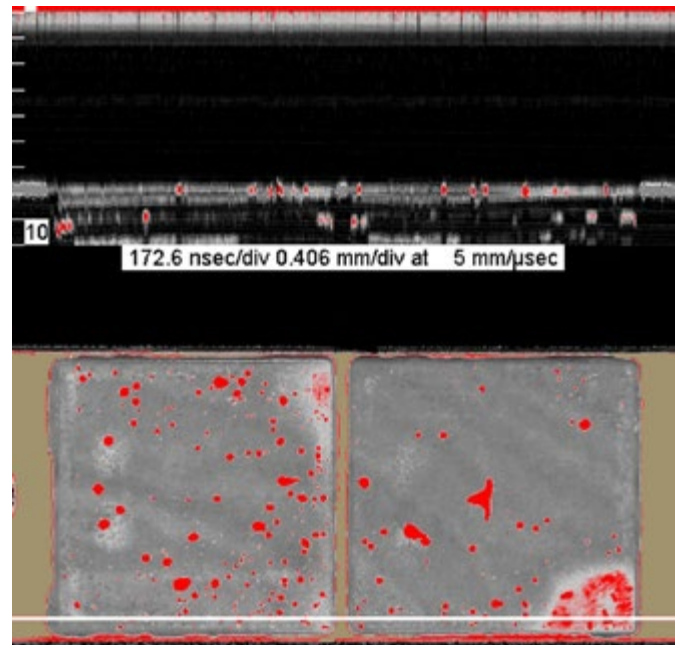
Sectioning through a gray region near the edge of the assembly reveals a lack of solder but many voids.
